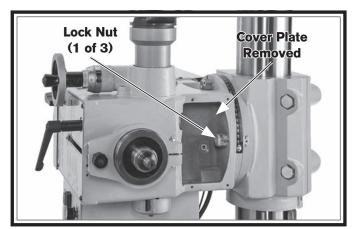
Cover plate removed from bottom of headstock (headstock tilted 90° for clarity).
